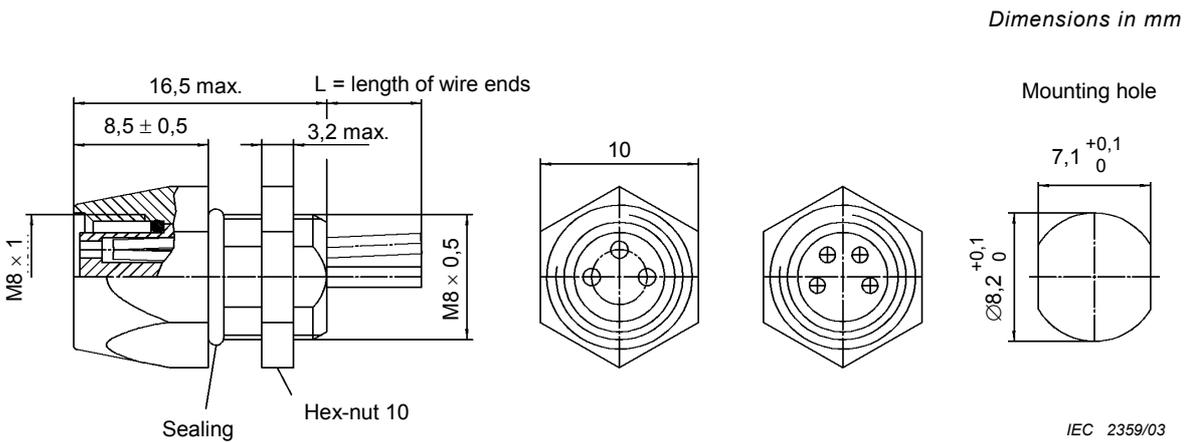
Fixed connector with wire ends, single hole rear mounting, female contacts
